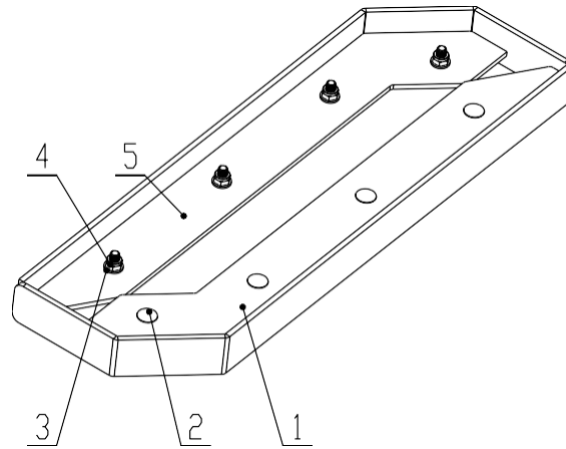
R&L Skid Weldment and Fittings
